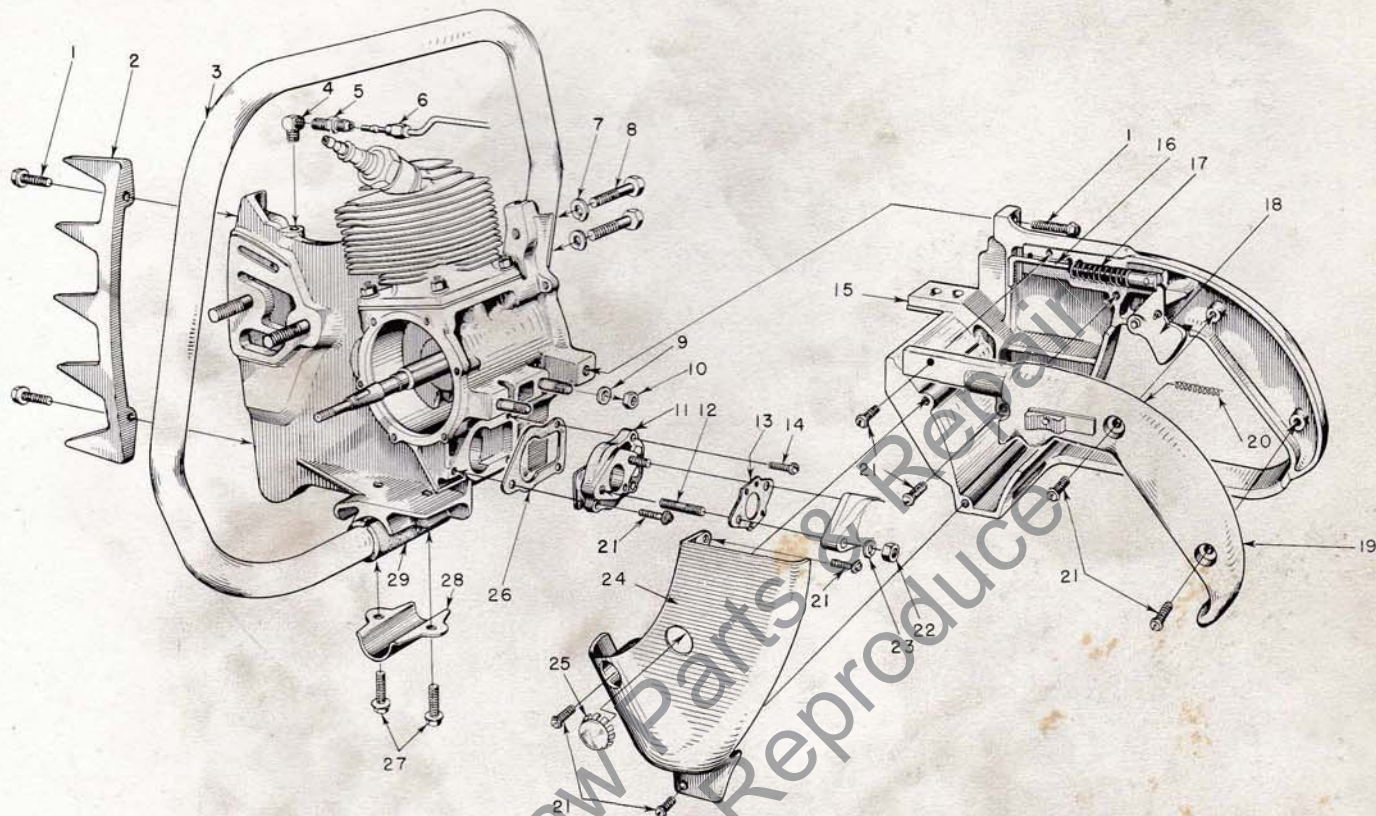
HANDLE, GRIP AND REED VALVE PARTS
